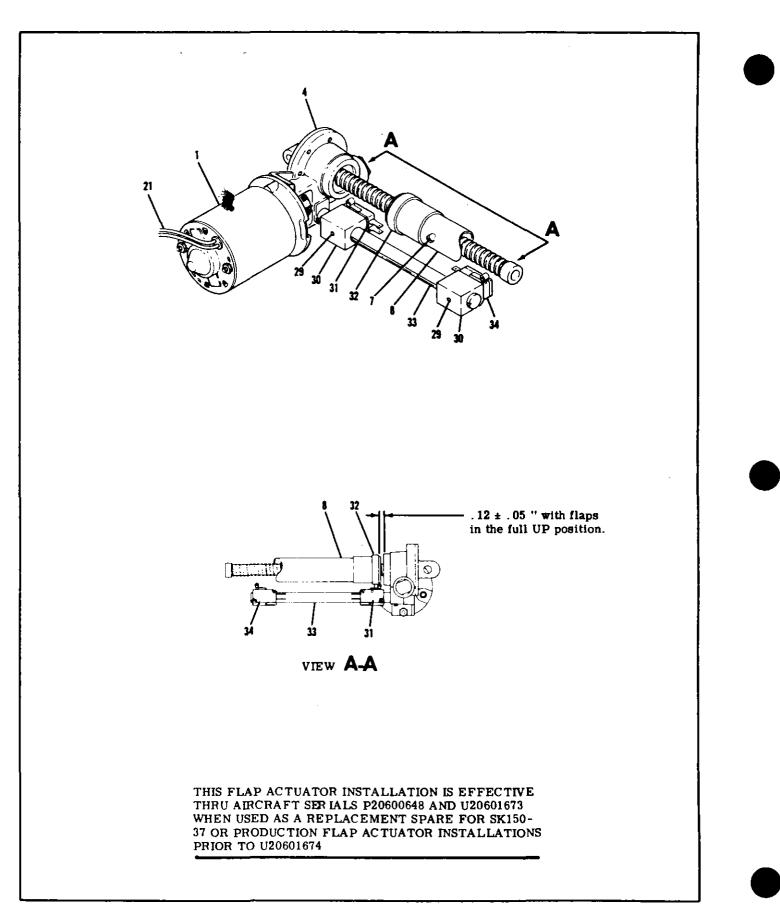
Flap Motor and Transmission Assembly (Sheet 3 of 3)
